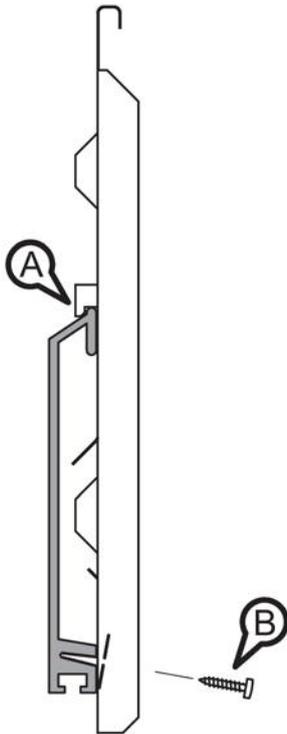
Side view of a mounting plate on an S7-300 standard rail
